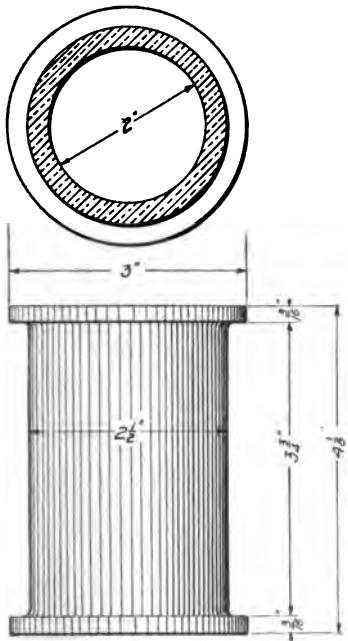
Finished Bronze Bearing Flanged at Both Ends
